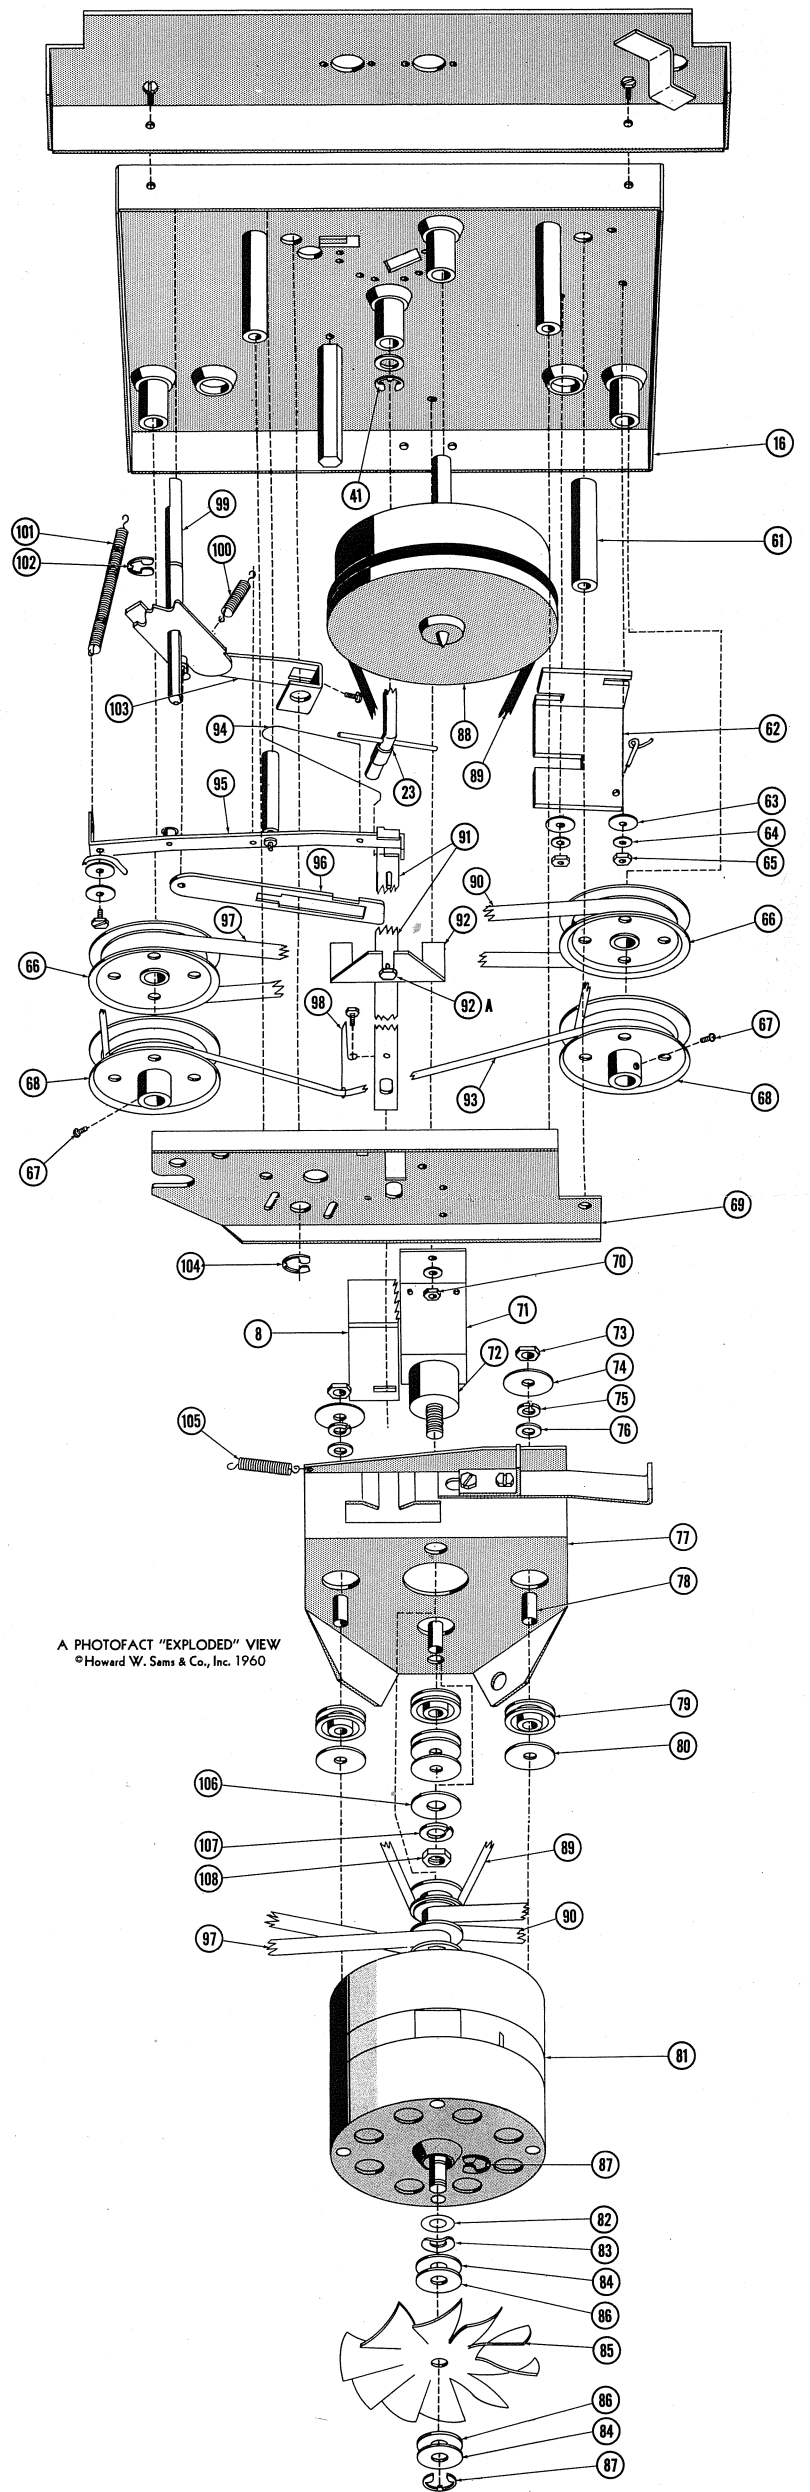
B EXPLODED VIEW OF PARTS BELOW BASEPLATE
